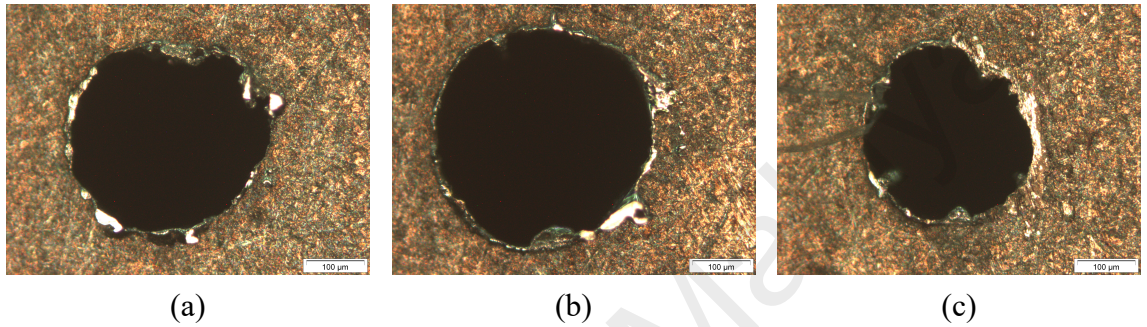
Holes bottom surfaces of 1000 μm AA5083 sheet
